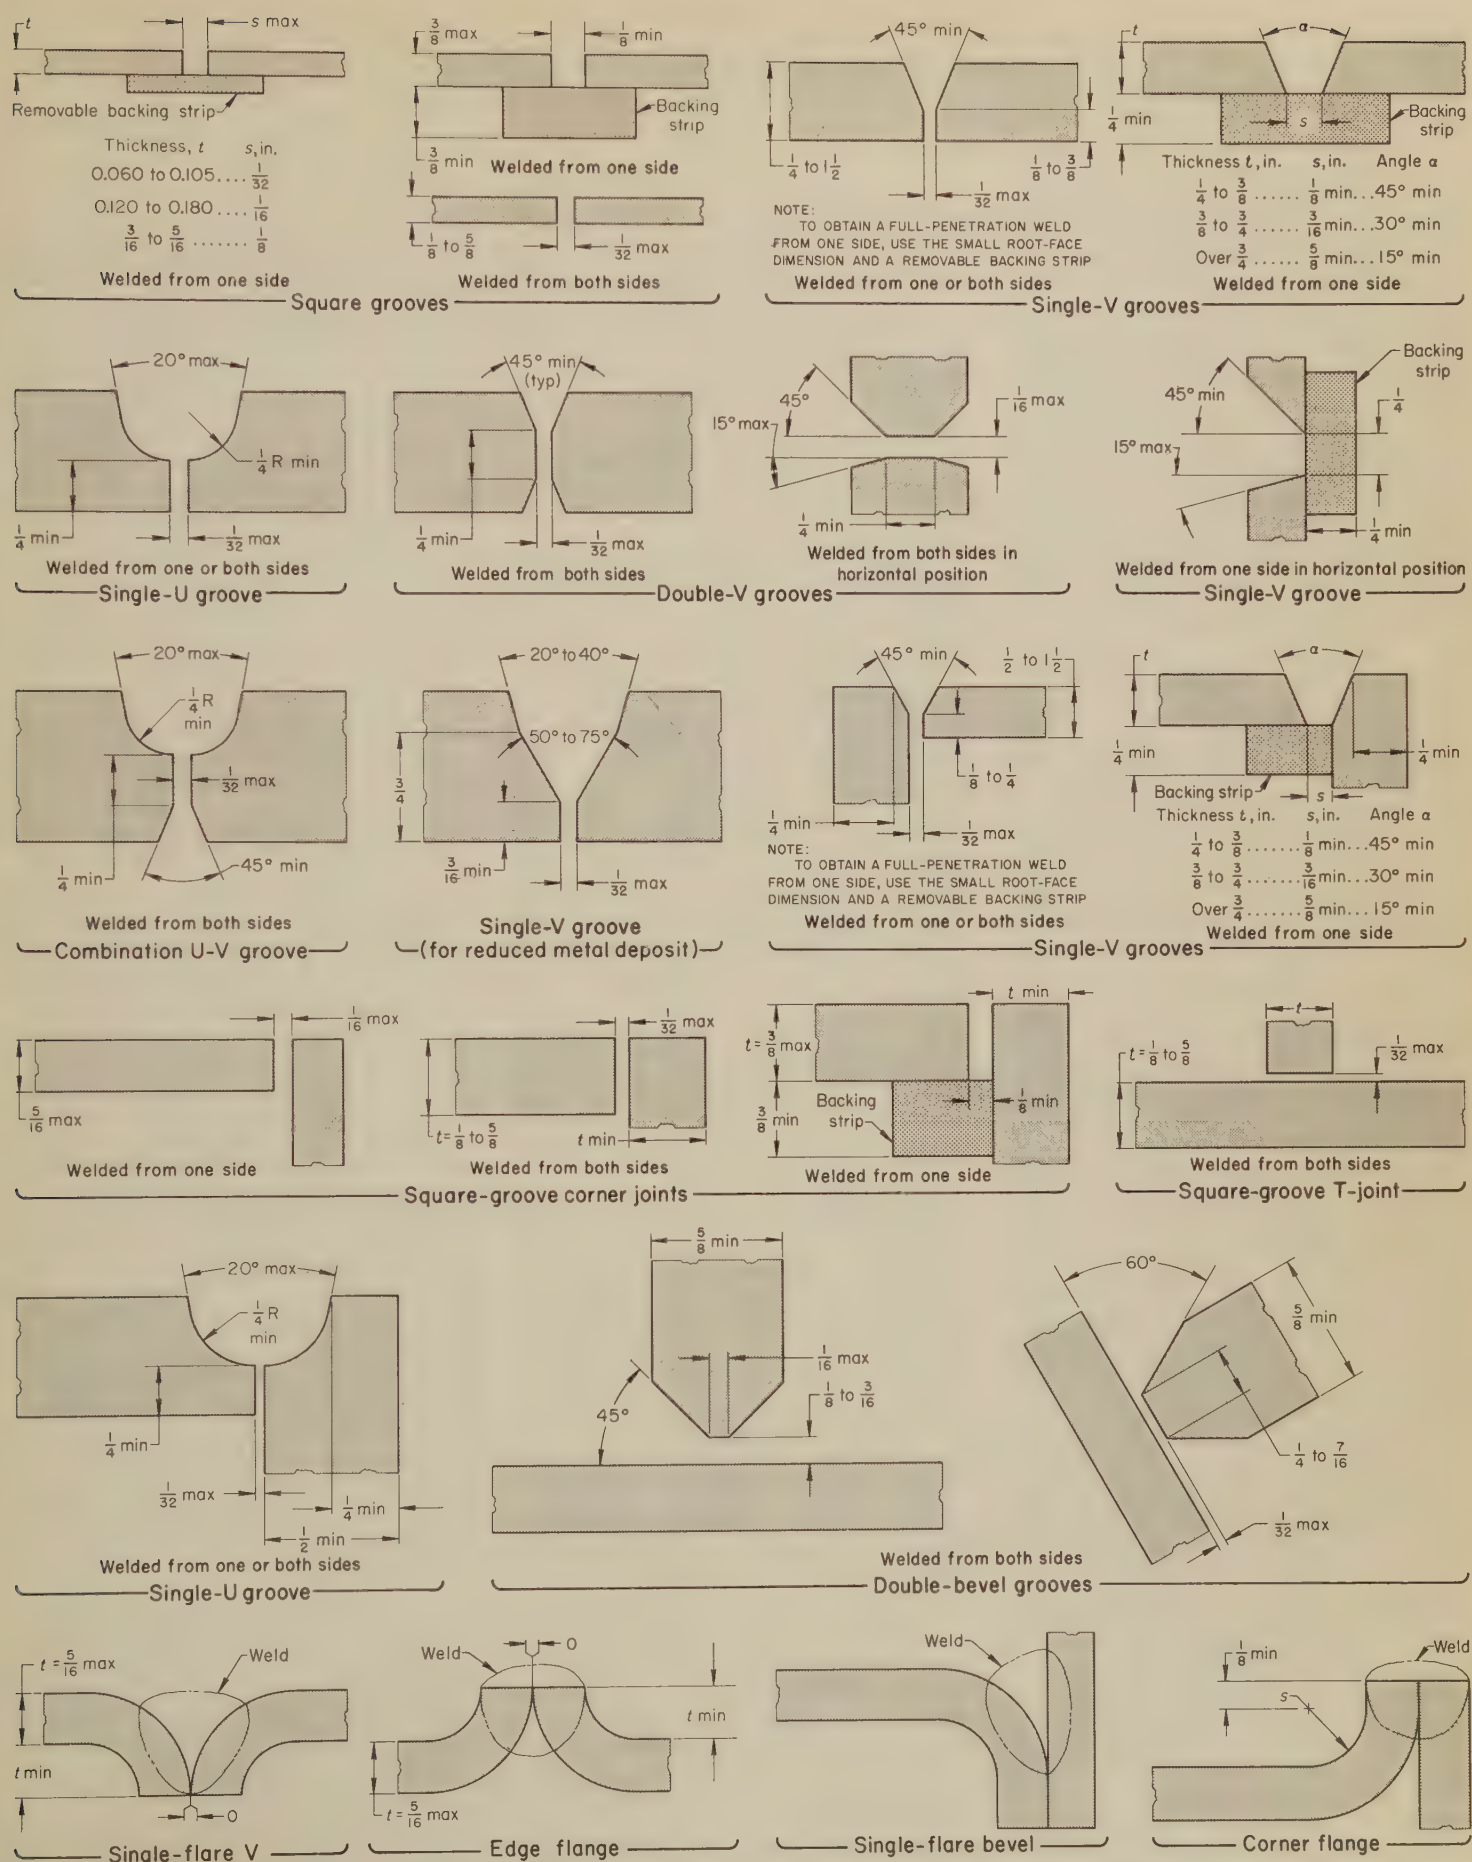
Recommended proportions of grooves for joints made by submerged-arc welding
